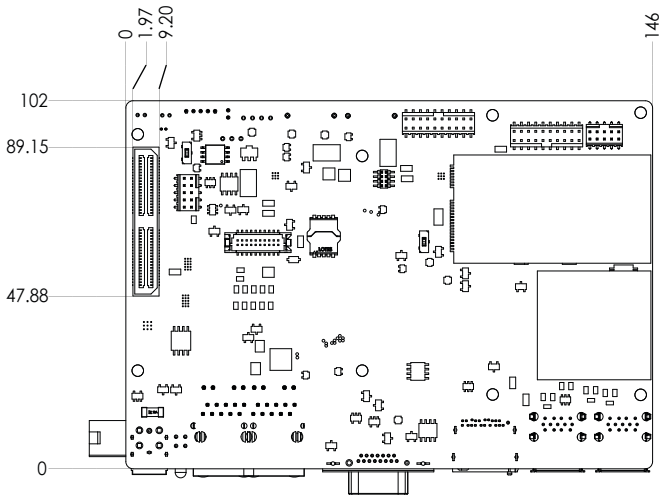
MIO-5271 Mechanical Drawing (Bottom Side)
